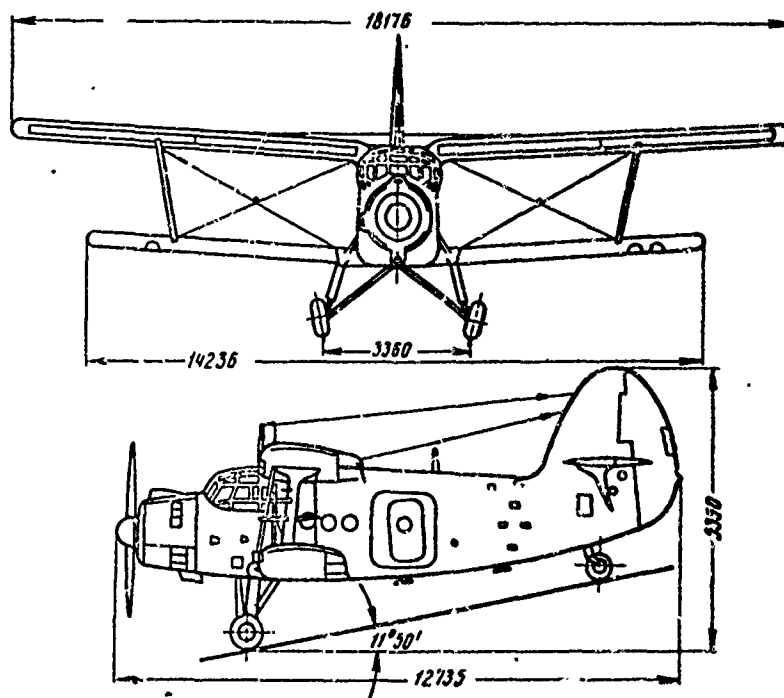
Configuration of An-2 aircraft with wheel-type landing gear. Front and side view.
